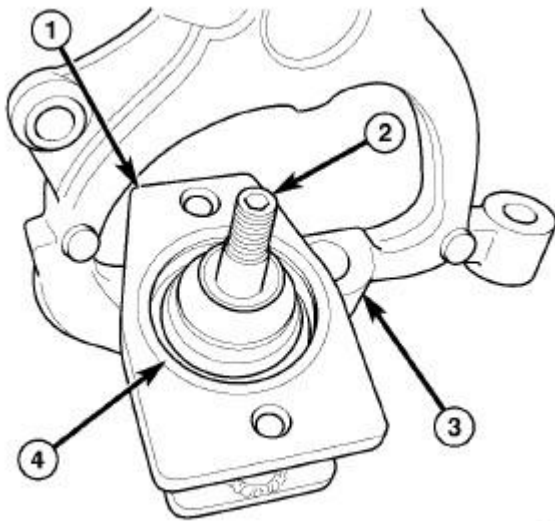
SUPPORT CLAMP POSITIONED OVER BALL JOINT
